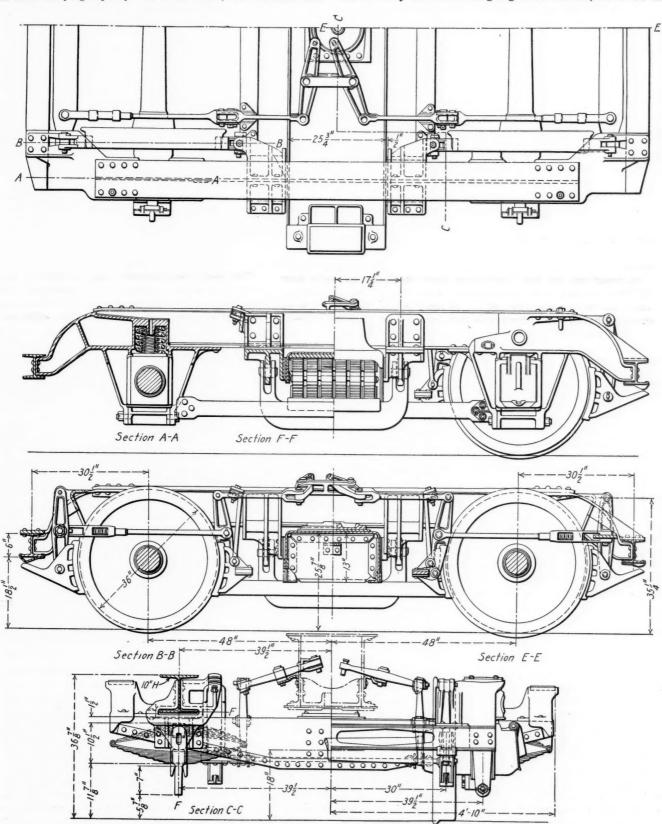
Present Standard Four-Wheel Steel Passenger Car Truck; Pennsylvania Railroad
